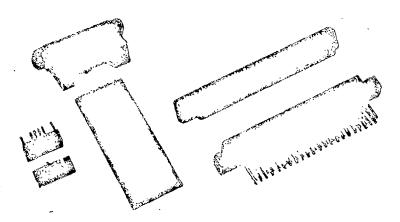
Some of the types of connectors developed for printed wiring boards. (Product Engineering.)
